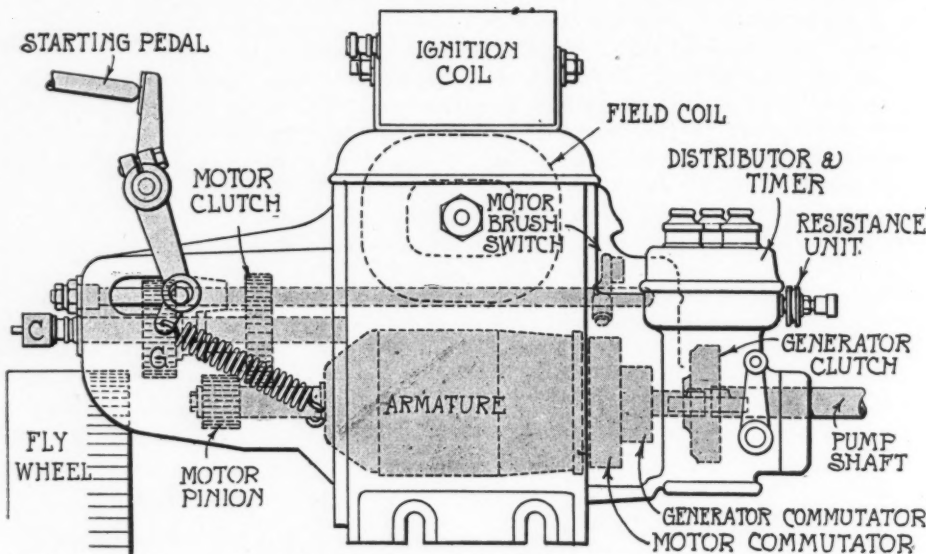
Typical generator-starter construction, showing ignition distributor, generator and starter clutch
